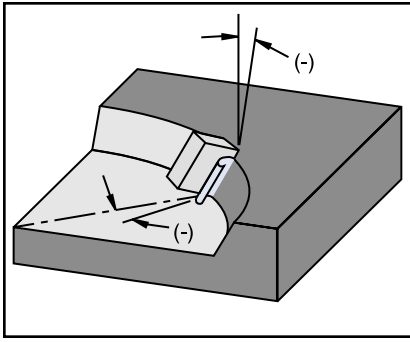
Negative geometries present a strong cutting edge, backed up by the bulk of the insert, but they generate large cutting forces and require enough power to “bull” through the workpiece.
